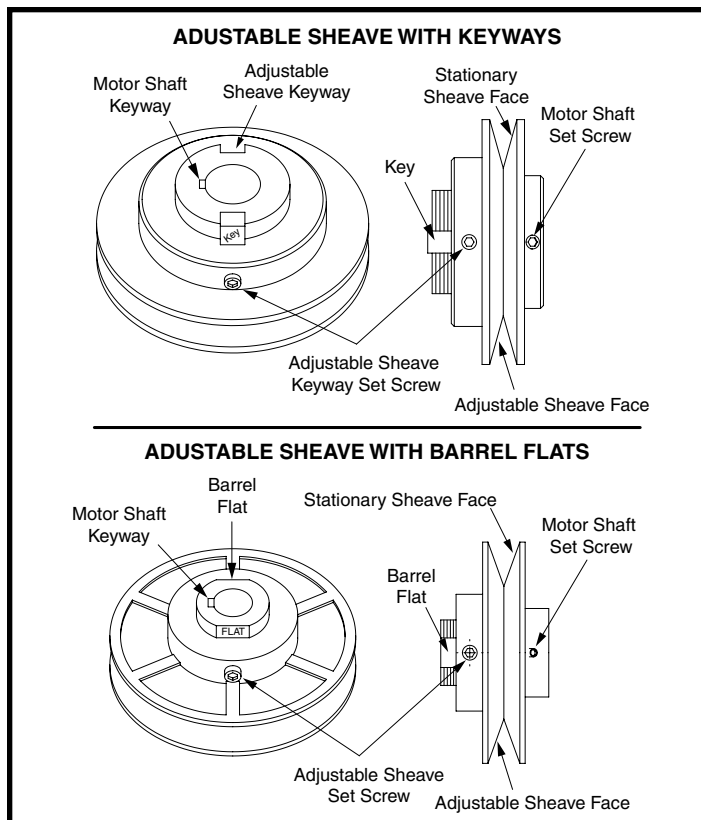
Adjustable Sheaves with Keyways or Barrel Flats
